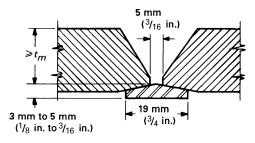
Typical Backing Rings and Consumable Inserts
